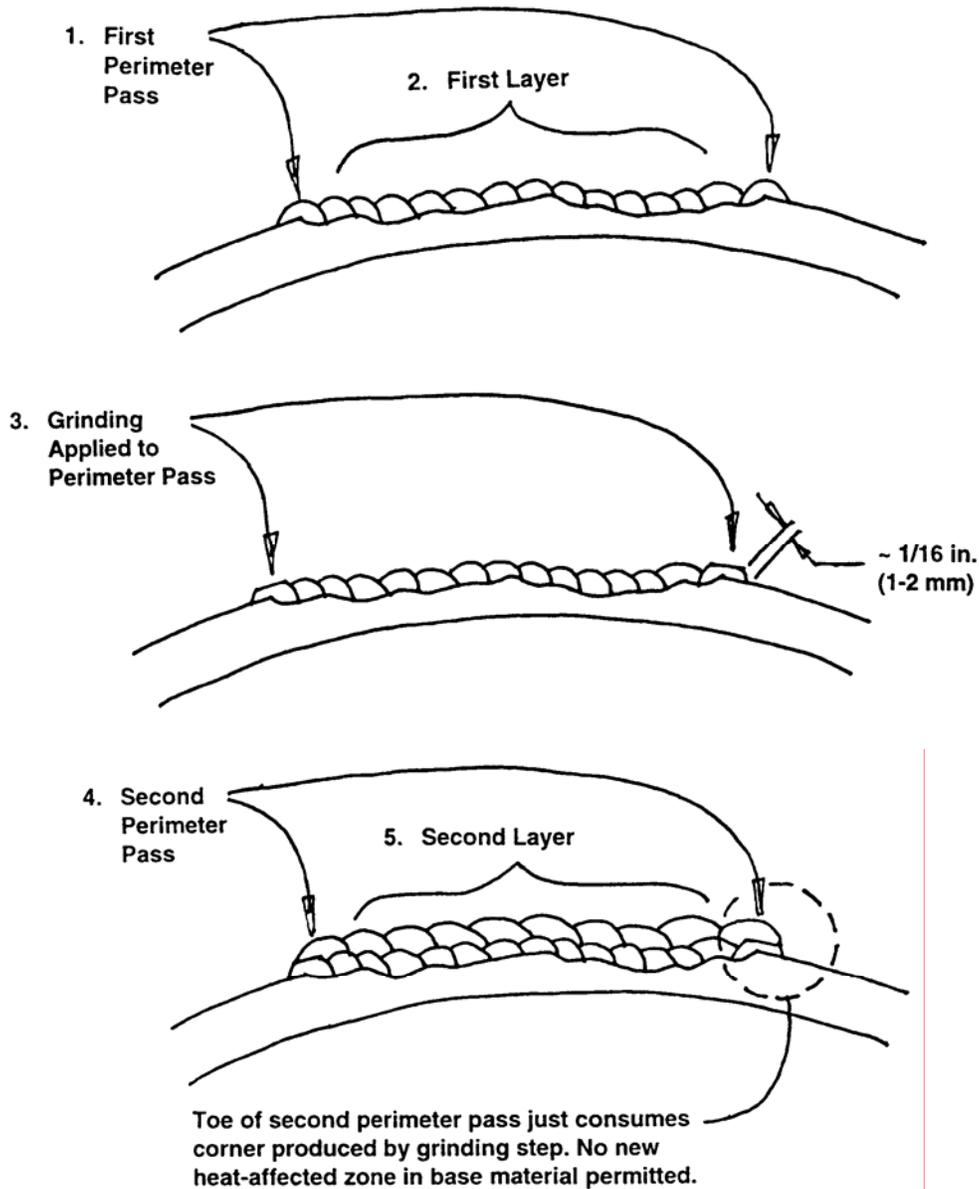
Illustration of Typical Weld Deposition Sequence
